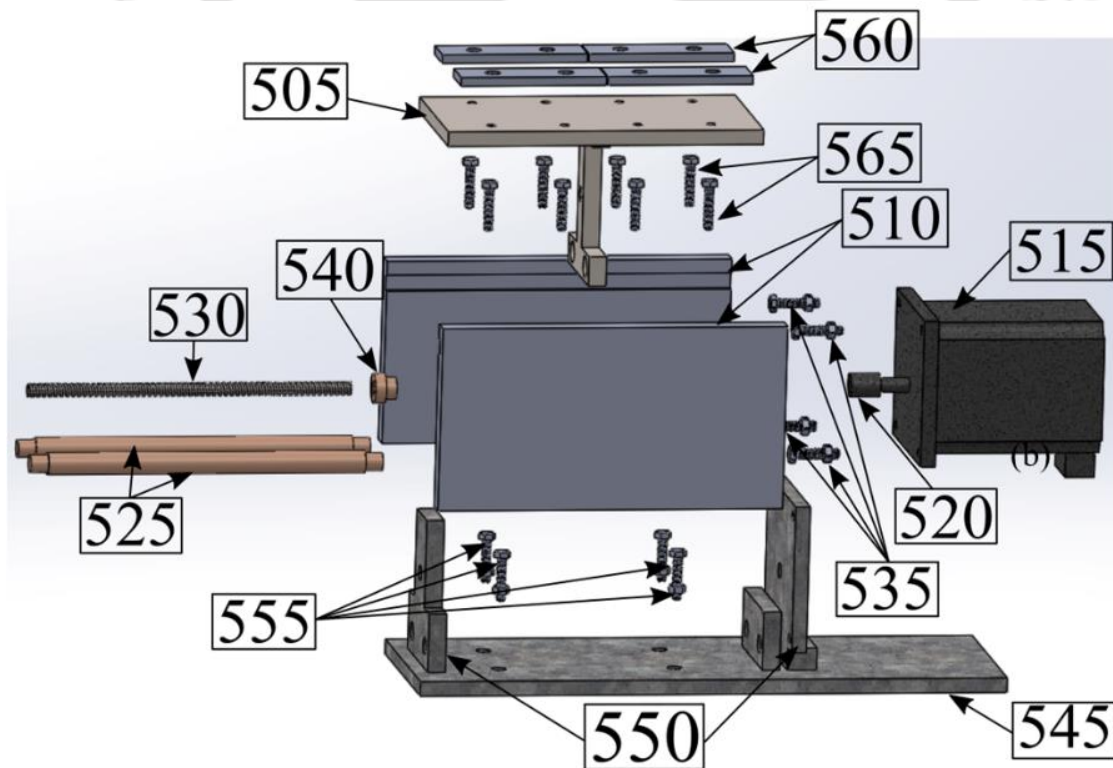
Illustrates the exploded view of the developed welding bed comprising various components
